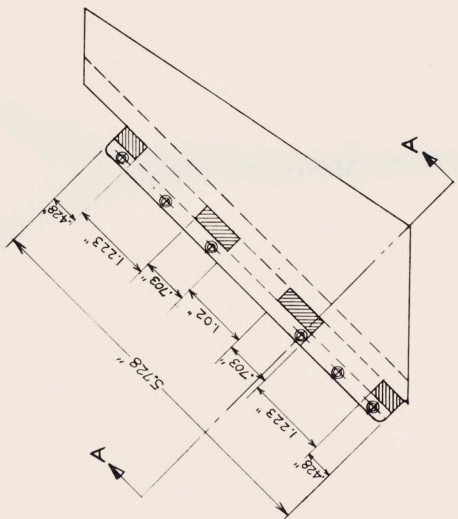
FIN ASSEMBLY MOUNTED IN WIND TUNNEL
